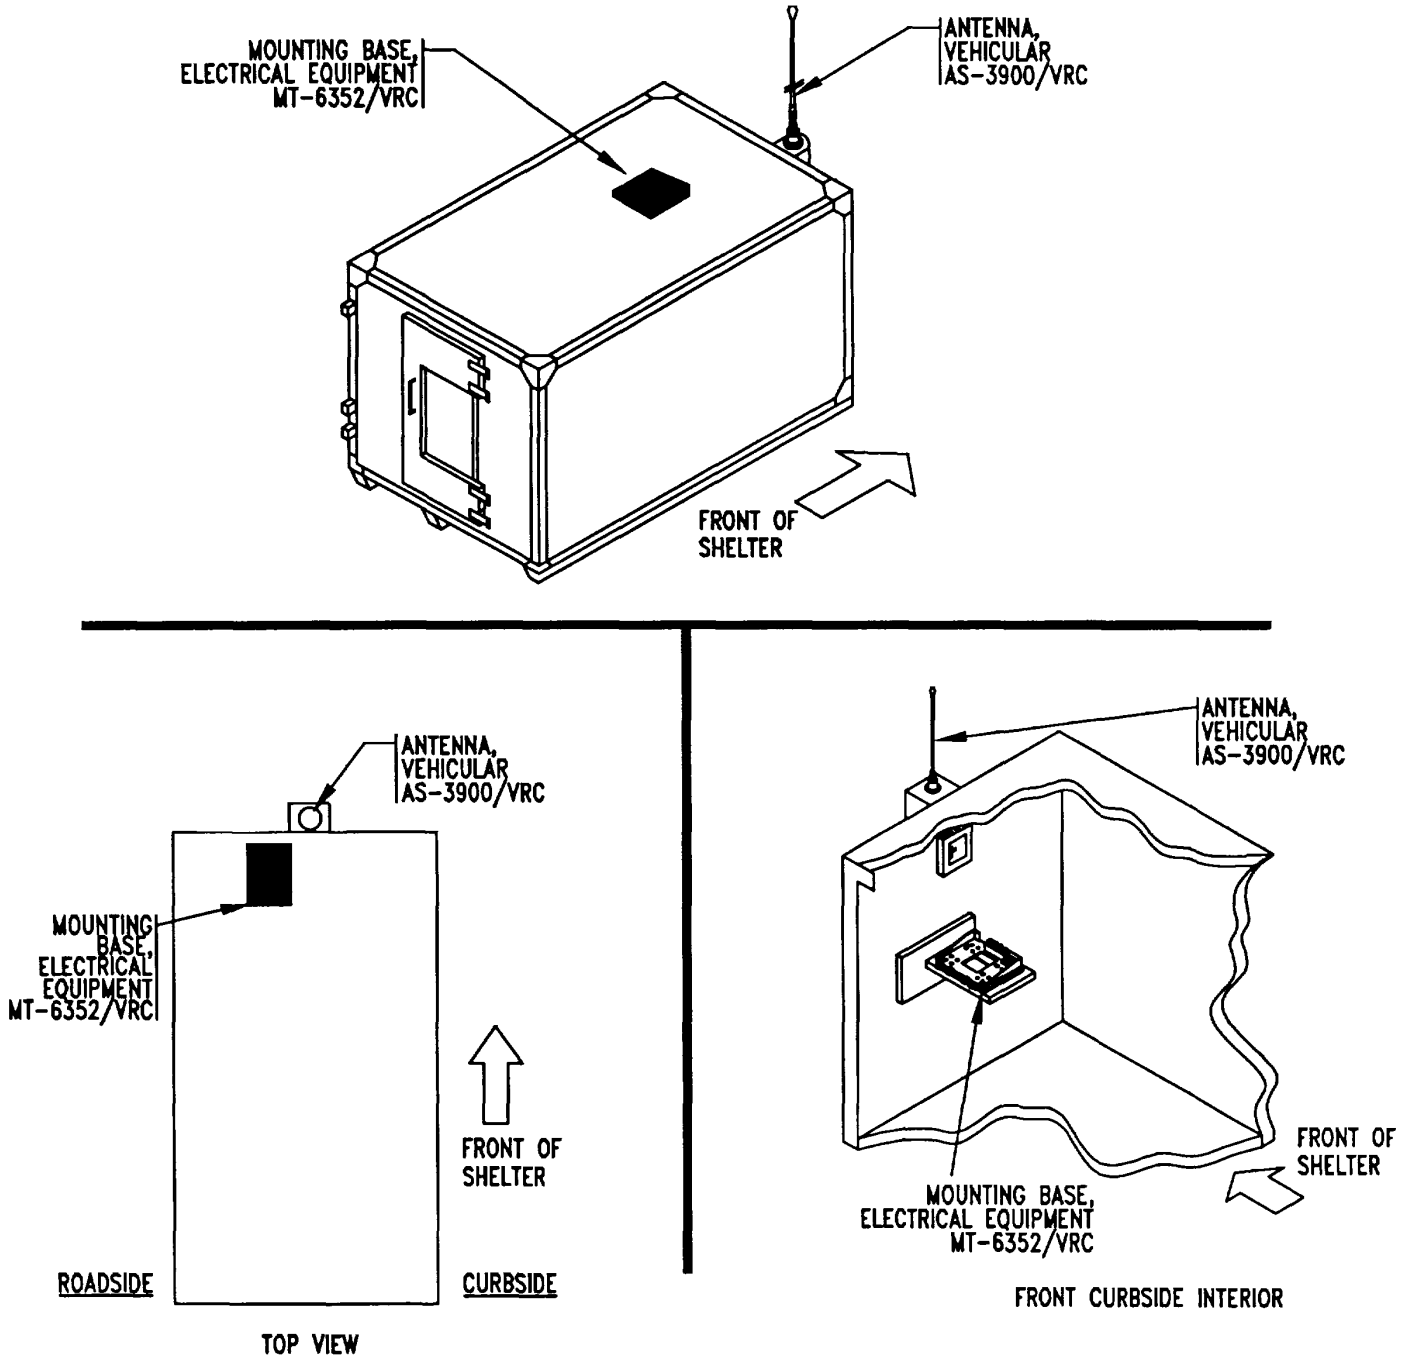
(1). MK and Radio Installation: MK Equipment Locations, AN/TRC-138
